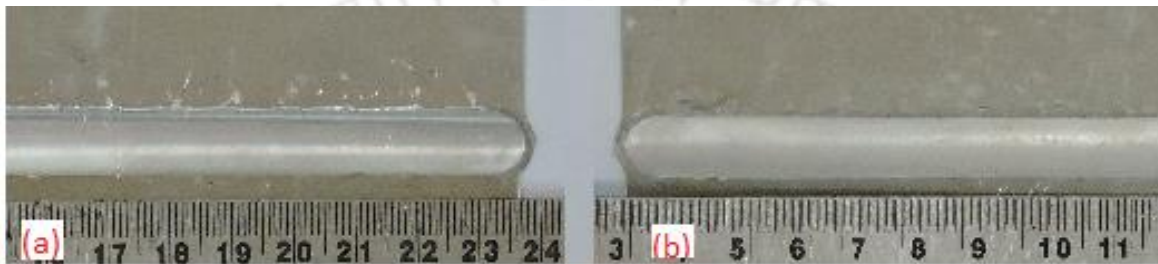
Surface appearance of FSWed sample at tool traverse rate (a) 63 mm/min and (b) 98 mm/min.
